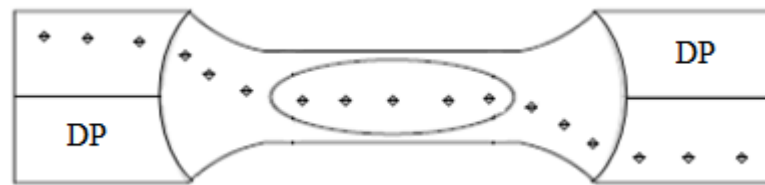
The hardness measurement on the diagonal of the weld cross section.
